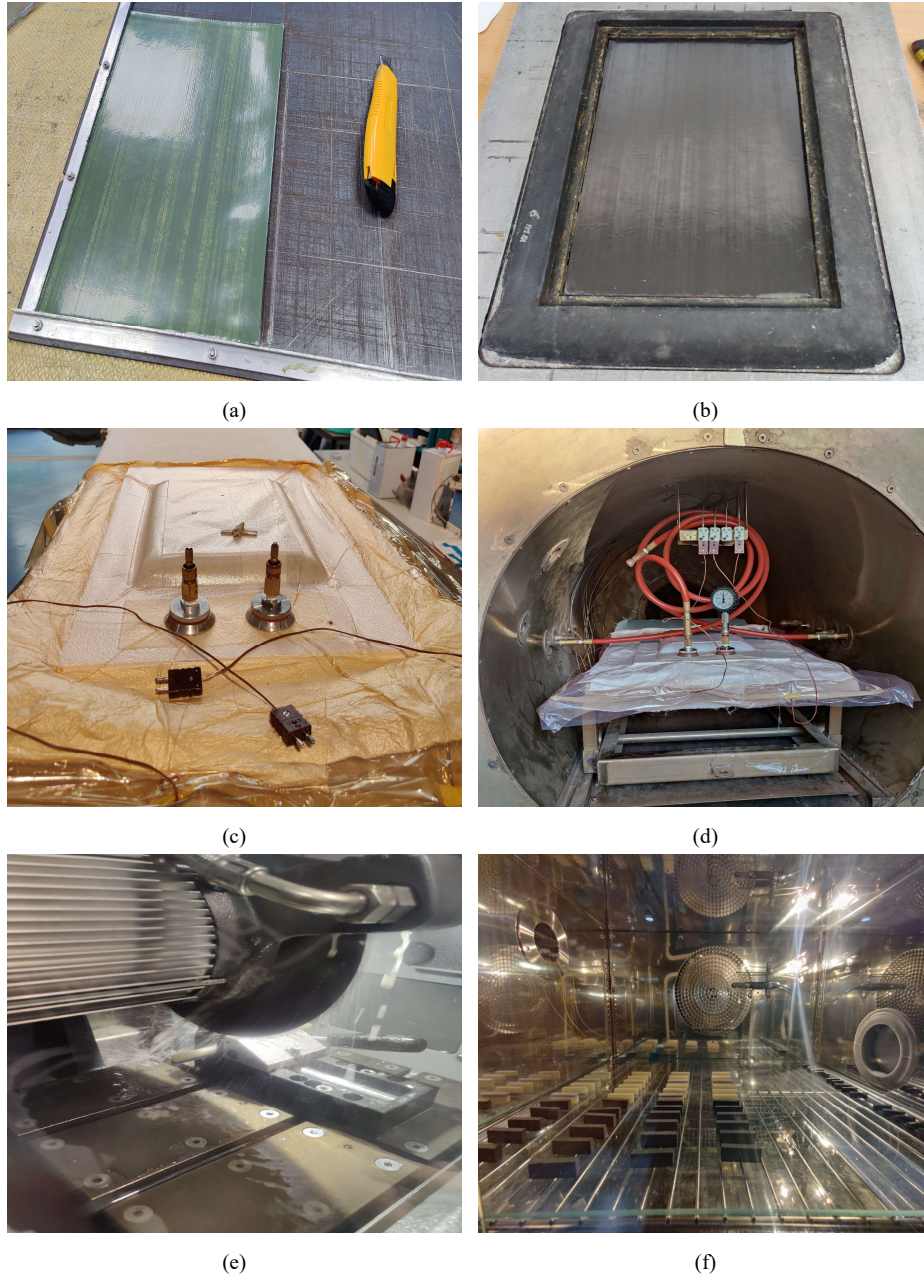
Manufacturing process: prepregs cutting (a), Mold (b), vacuum bag (c), autoclave (d), circular saw (e), ILSS specimens (f)
